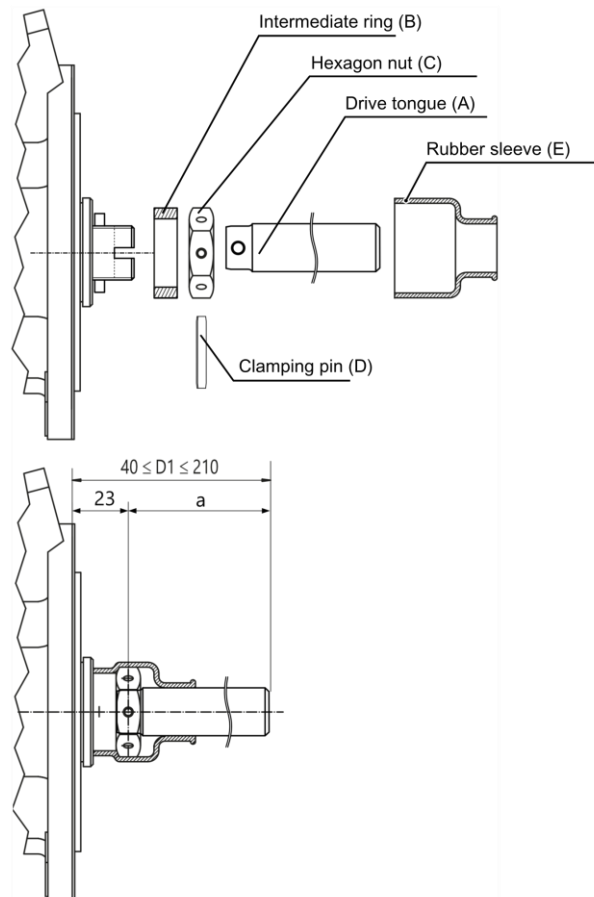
/6: DF 16/1 drive type ado: Assembly of the drive tongue
